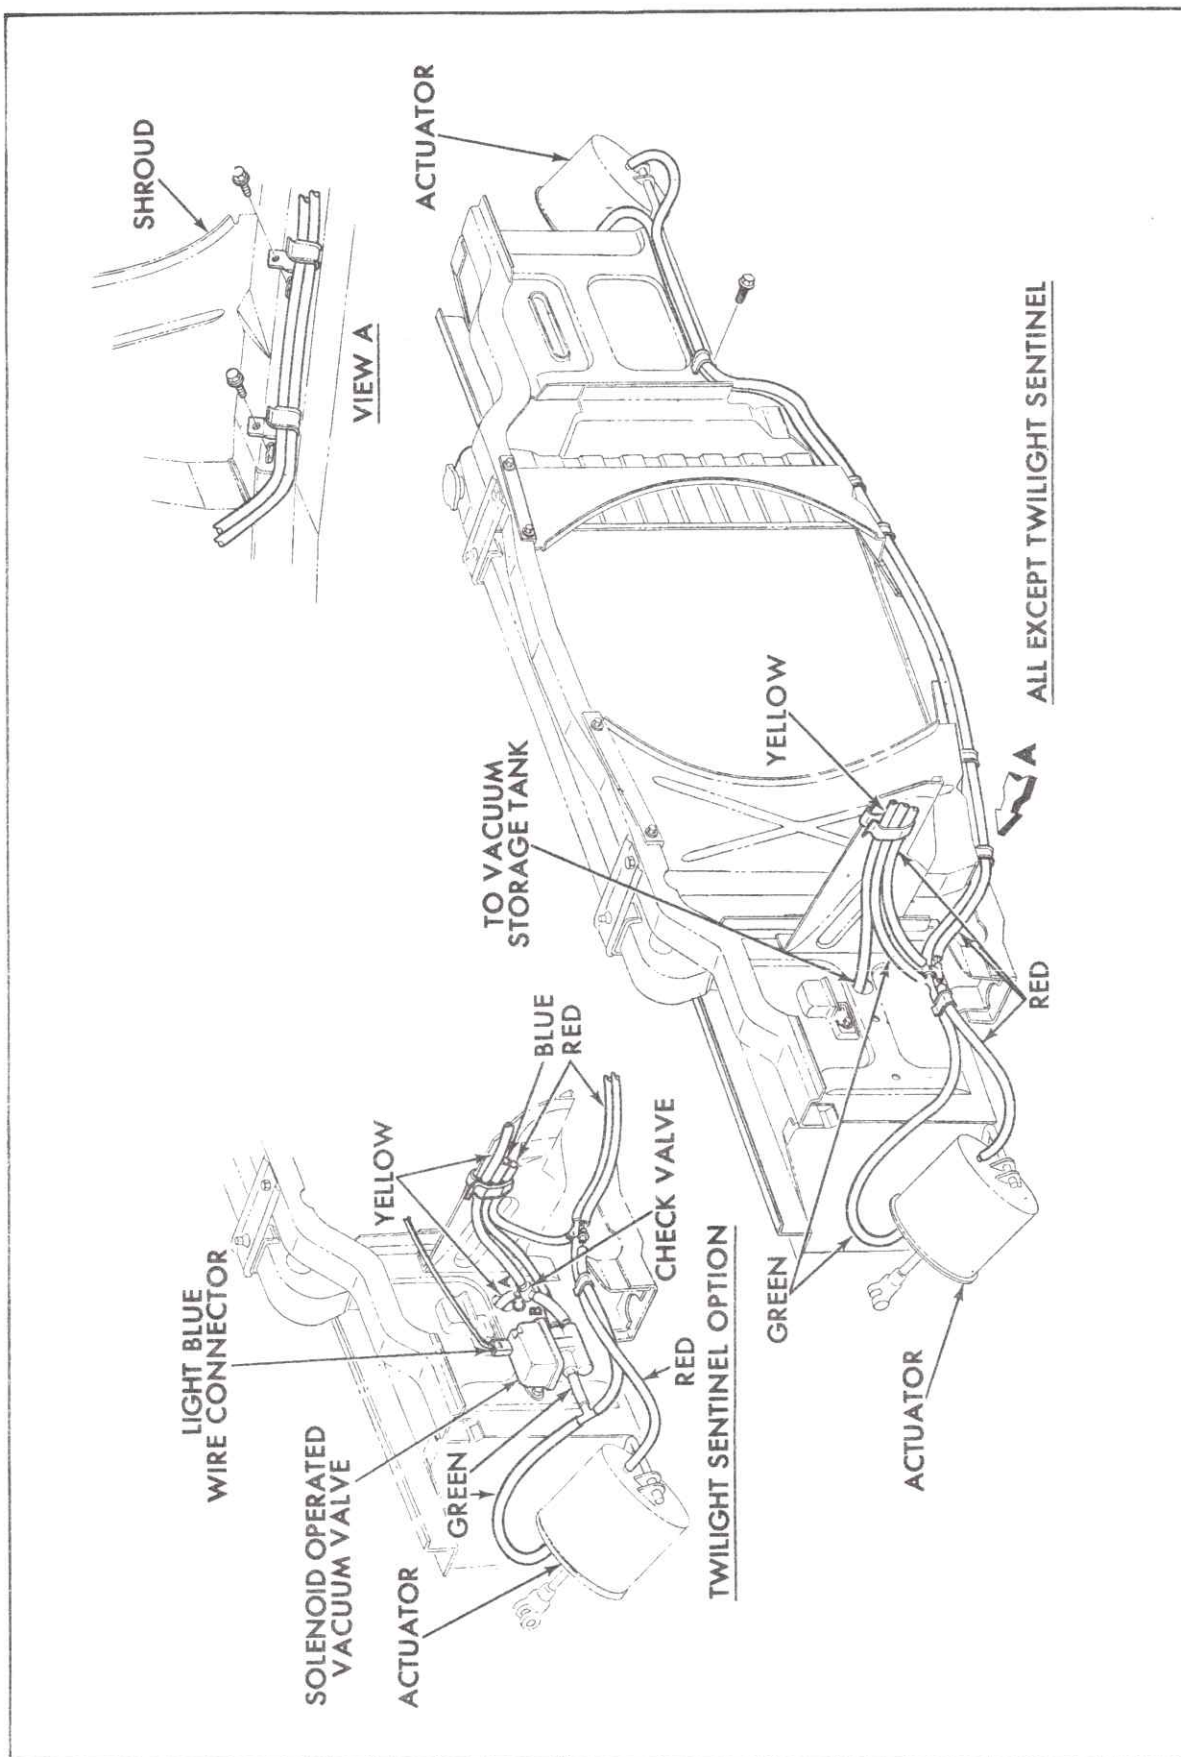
Headlamp Doors - Vacuum Schematic
